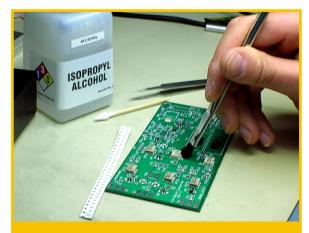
Clean solder connections with a hobby brush and alcohol. This keeps the board clean and free of corrosive rosin, whether building Manhattan or a PCB.
